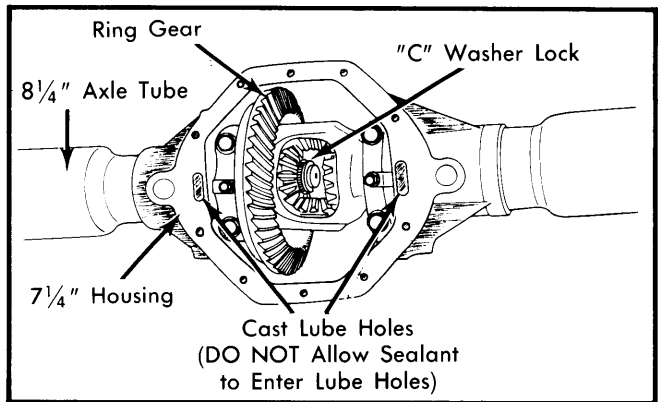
Modified 7 1/4" Direct-On Roller Differential Showing Location of "C" Washer and Roller Bearing Lube Holes
